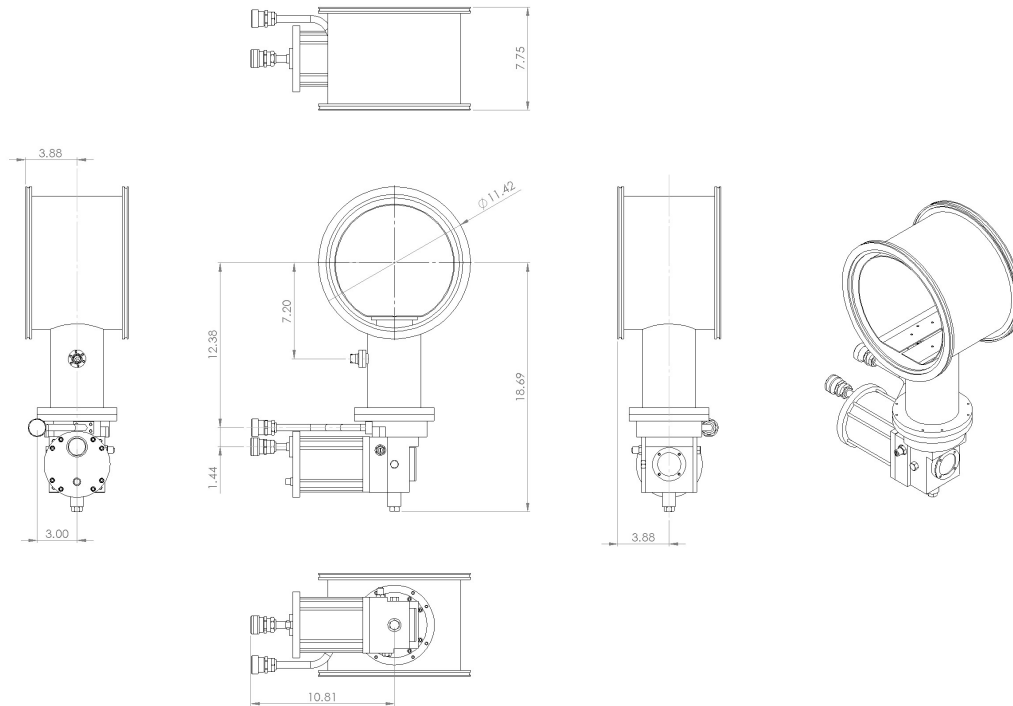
Dimensional Drawing of a 10" In-Line Cryogenic Water Pump with CF & ISO Inlet Flange
